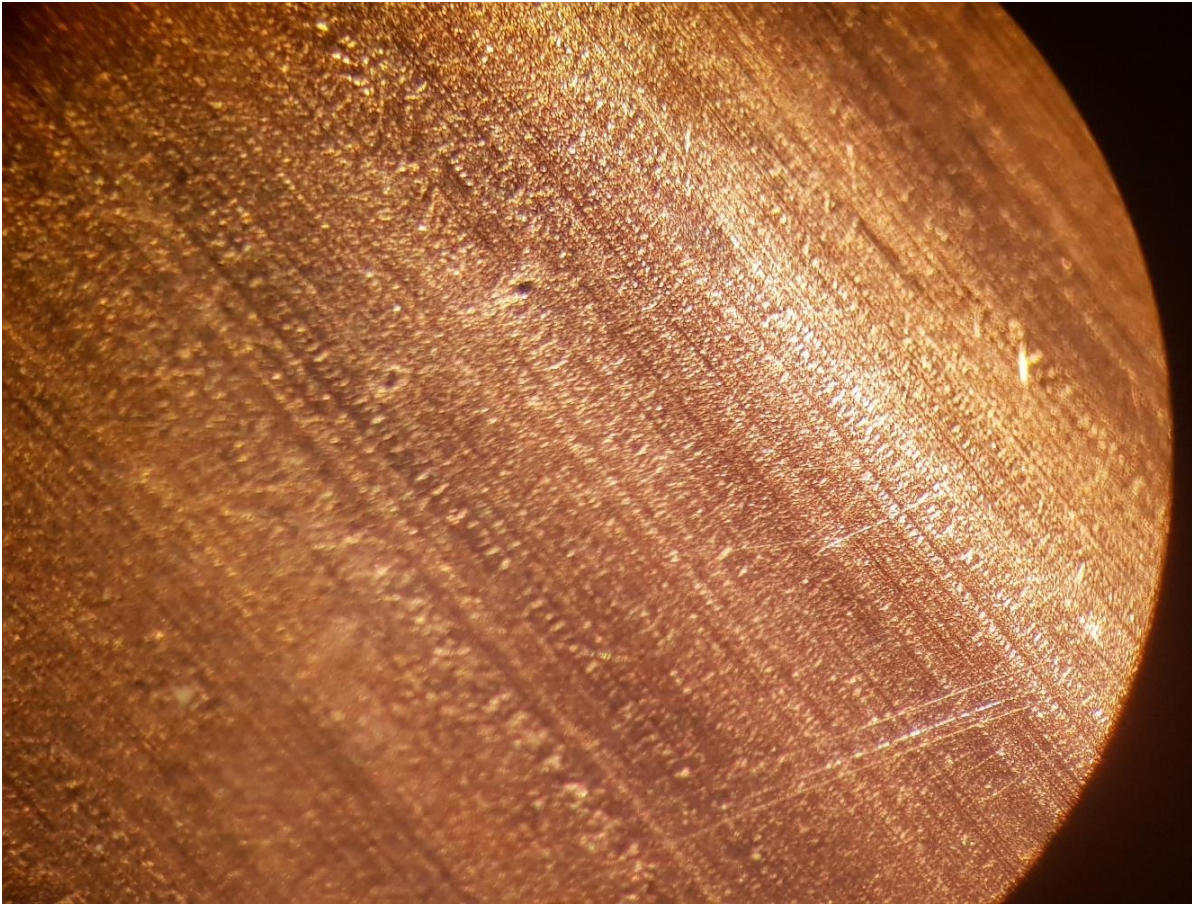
Outer surface of a copper tube that had clear bending ($\times 6,3$)
